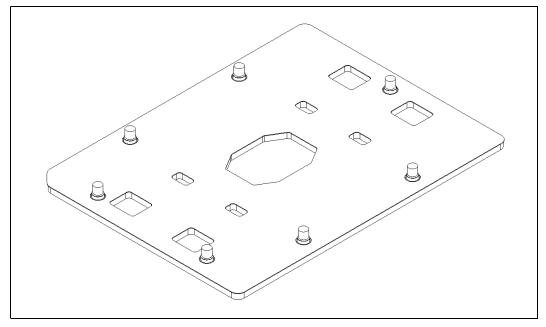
Narrow Non-Fabric Bolster Plate Assembly (ISO View)
